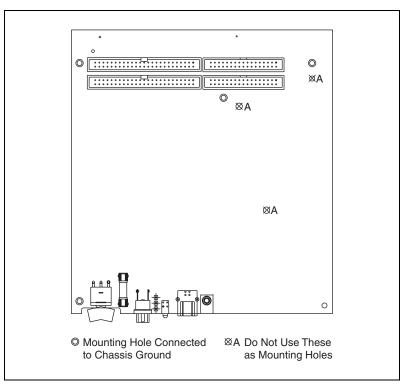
Customer Mounting Holes (USB-6225/6229/6255/6259/6289 OEM Shown)
